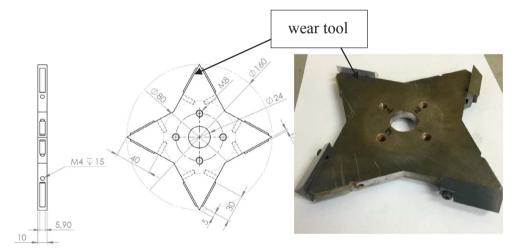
Technical drawing of the wear tool carrier and photo of the arrangement of the wear tools (measurements in mm).
